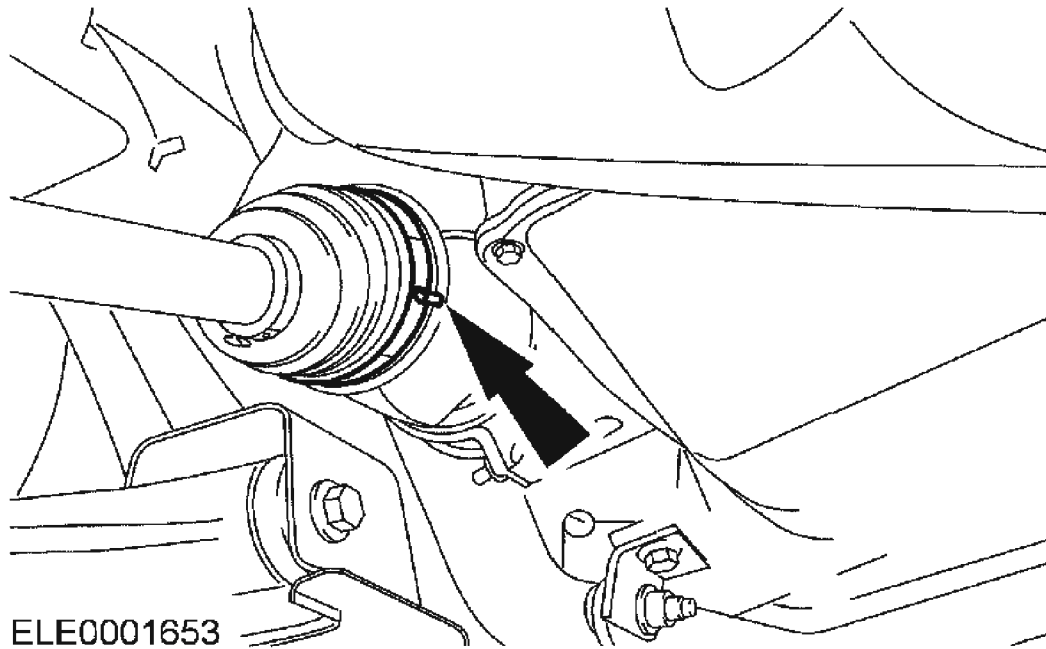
Inserting Clamping Strap In Gaiter Ring Groove And Tighten It With Locking Clamp
